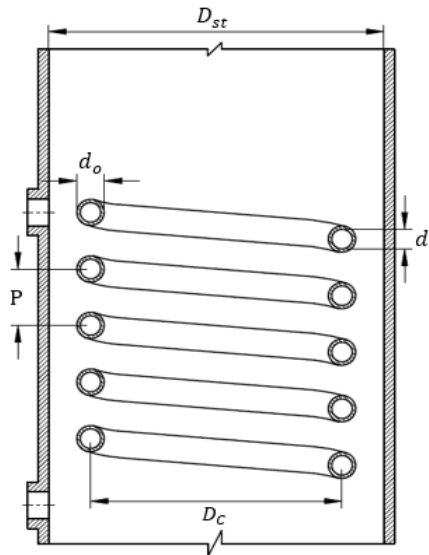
Schematic cut-away view of a helical coil heat exchanger
